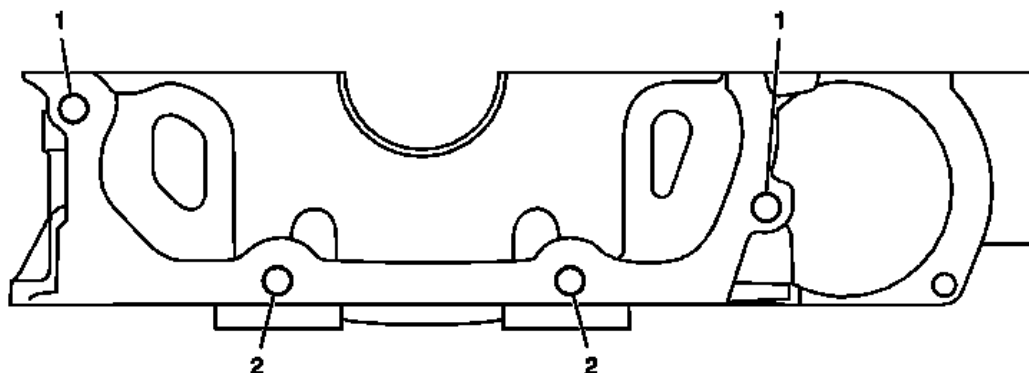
Identifying Bolt Size & Locations On Engine Block - Top
